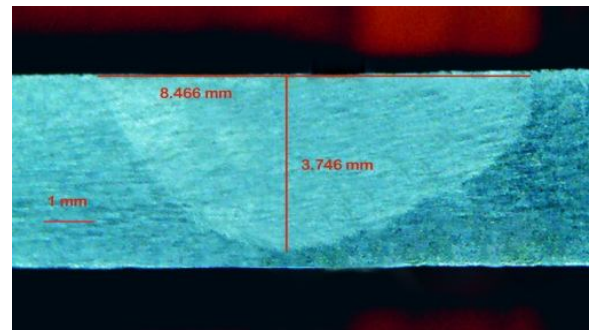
macrostructure of welded specimen using SiO₂ flux
